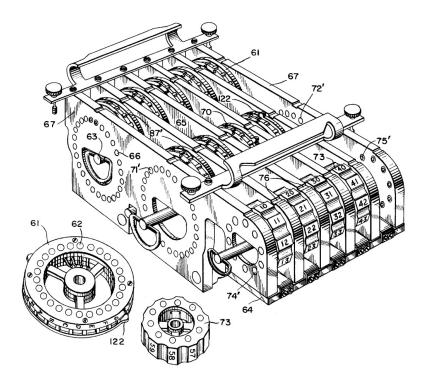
The SIGABA's Rotor Cage and Rotors. The rotor cage is shown at the top. The rotor banks from left to right are: cipher rotor bank, control rotor bank, and index rotor bank. Sample rotors are shown below the rotor cage. The rotor on the left is a 26-contact cipher or control rotor, and the rotor in the middle is a 10-contact index rotor. Image from [SS01].
